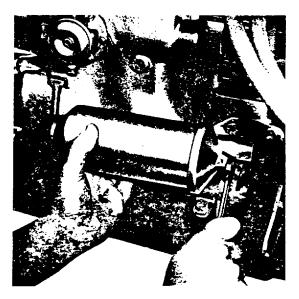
Removing the Lubricating Oil Filter Bowl Securing Screw. (Replaceable element type)
